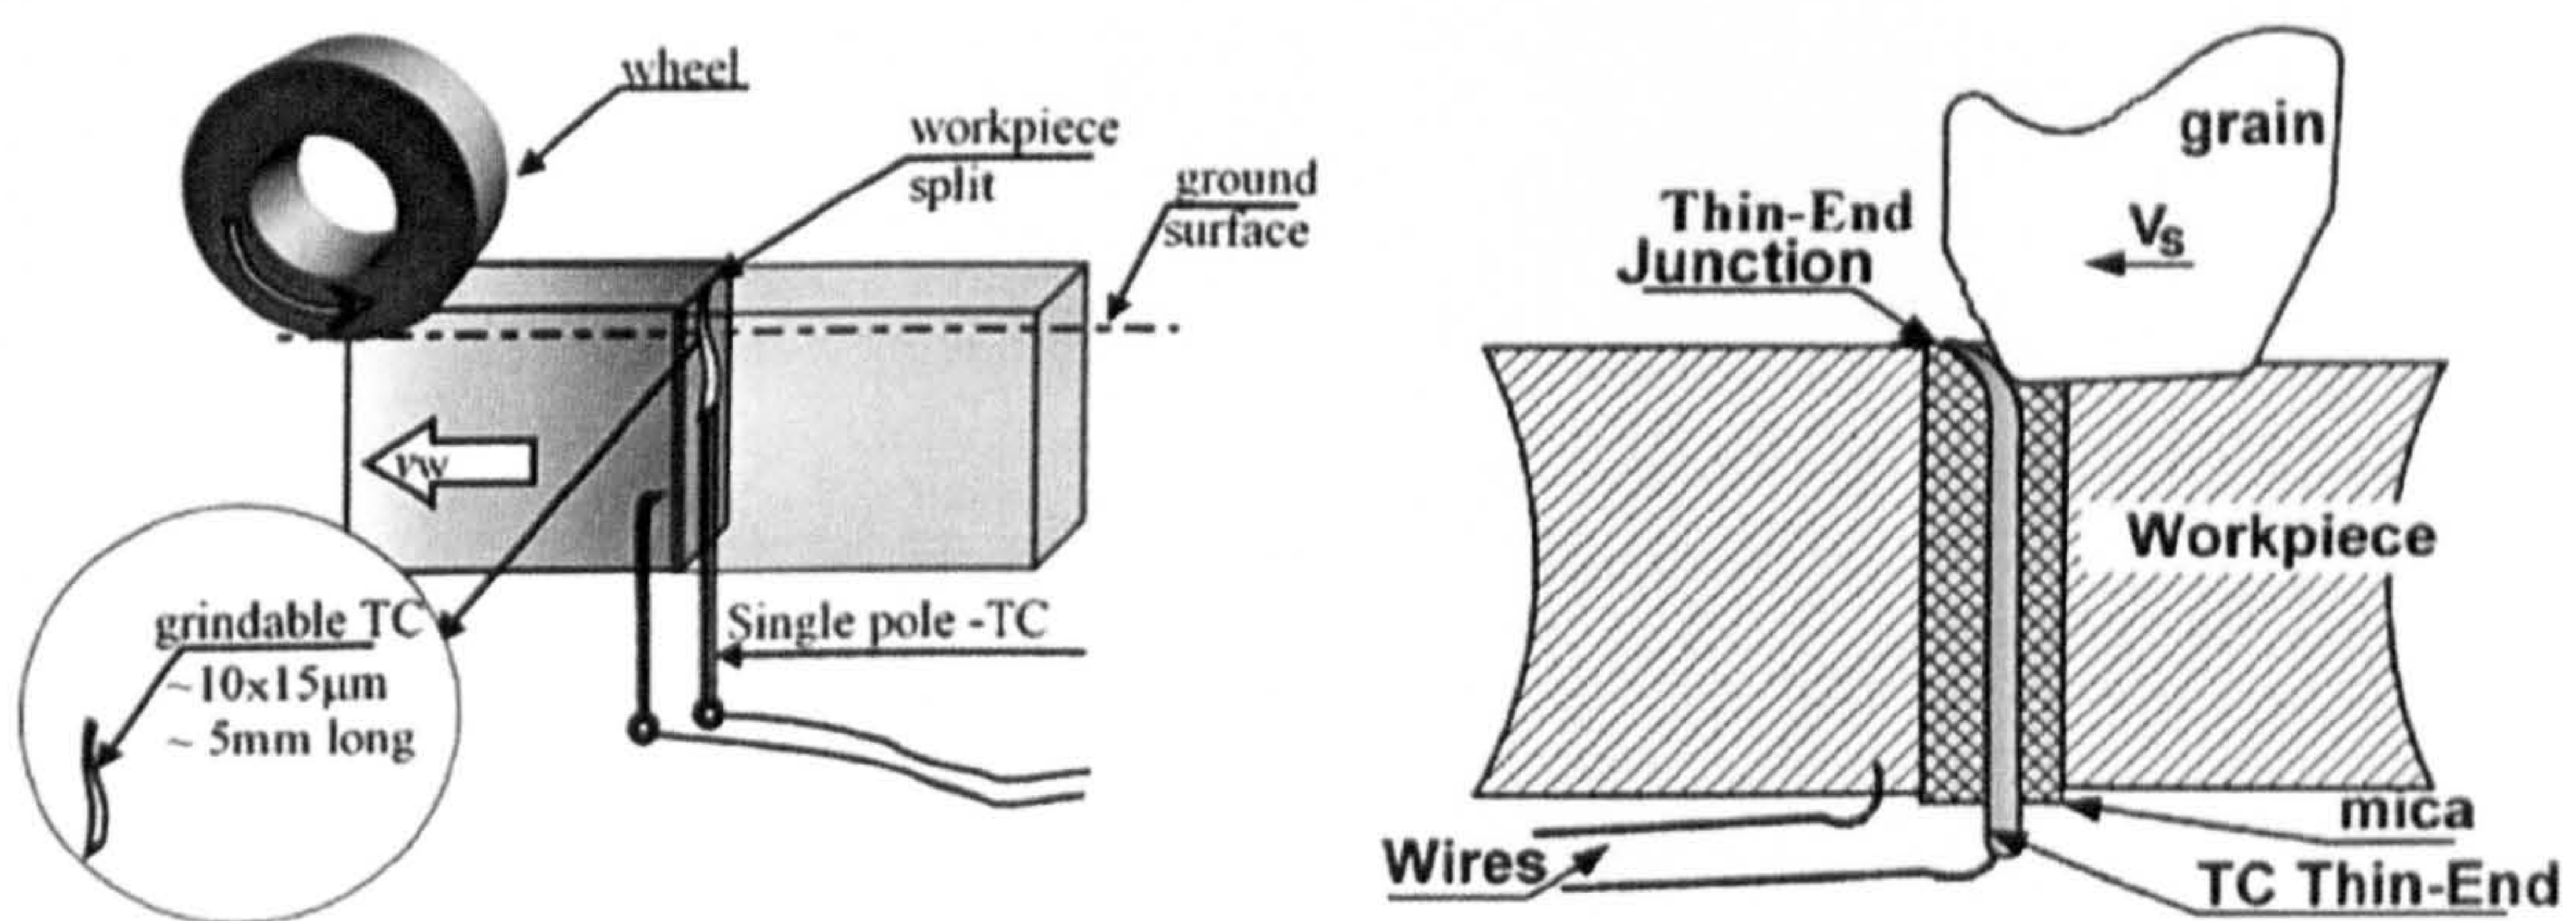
Thermocouple assembly and principle of operation (Batako, 2005).
